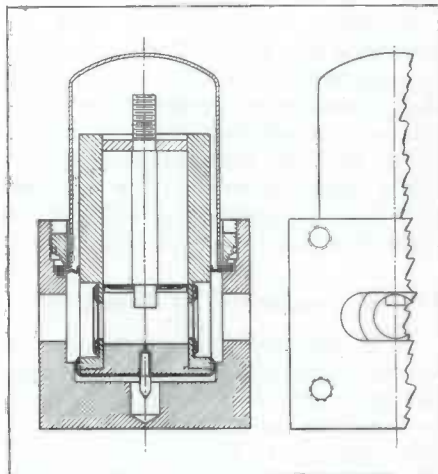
Drawing showing the mounting arrangement of the resonant cavity with aluminum dome in place over tuning mechanism
